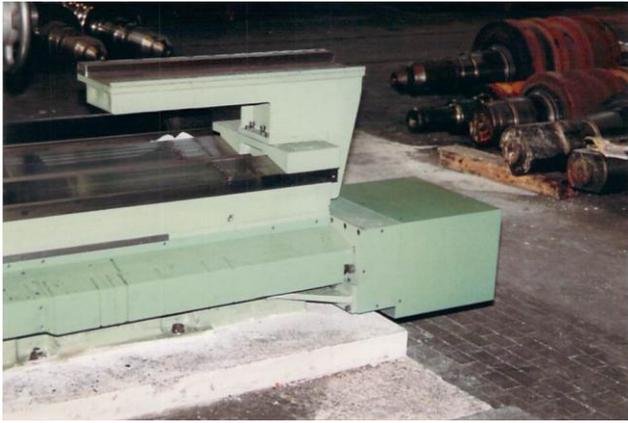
The tailstock has to go out the rollers from the claws box, always unclamped with an extremely good clamping and are then moved back. The hydraulic always had to be revised in all machines, because there was leakage, which complicated the handling.
